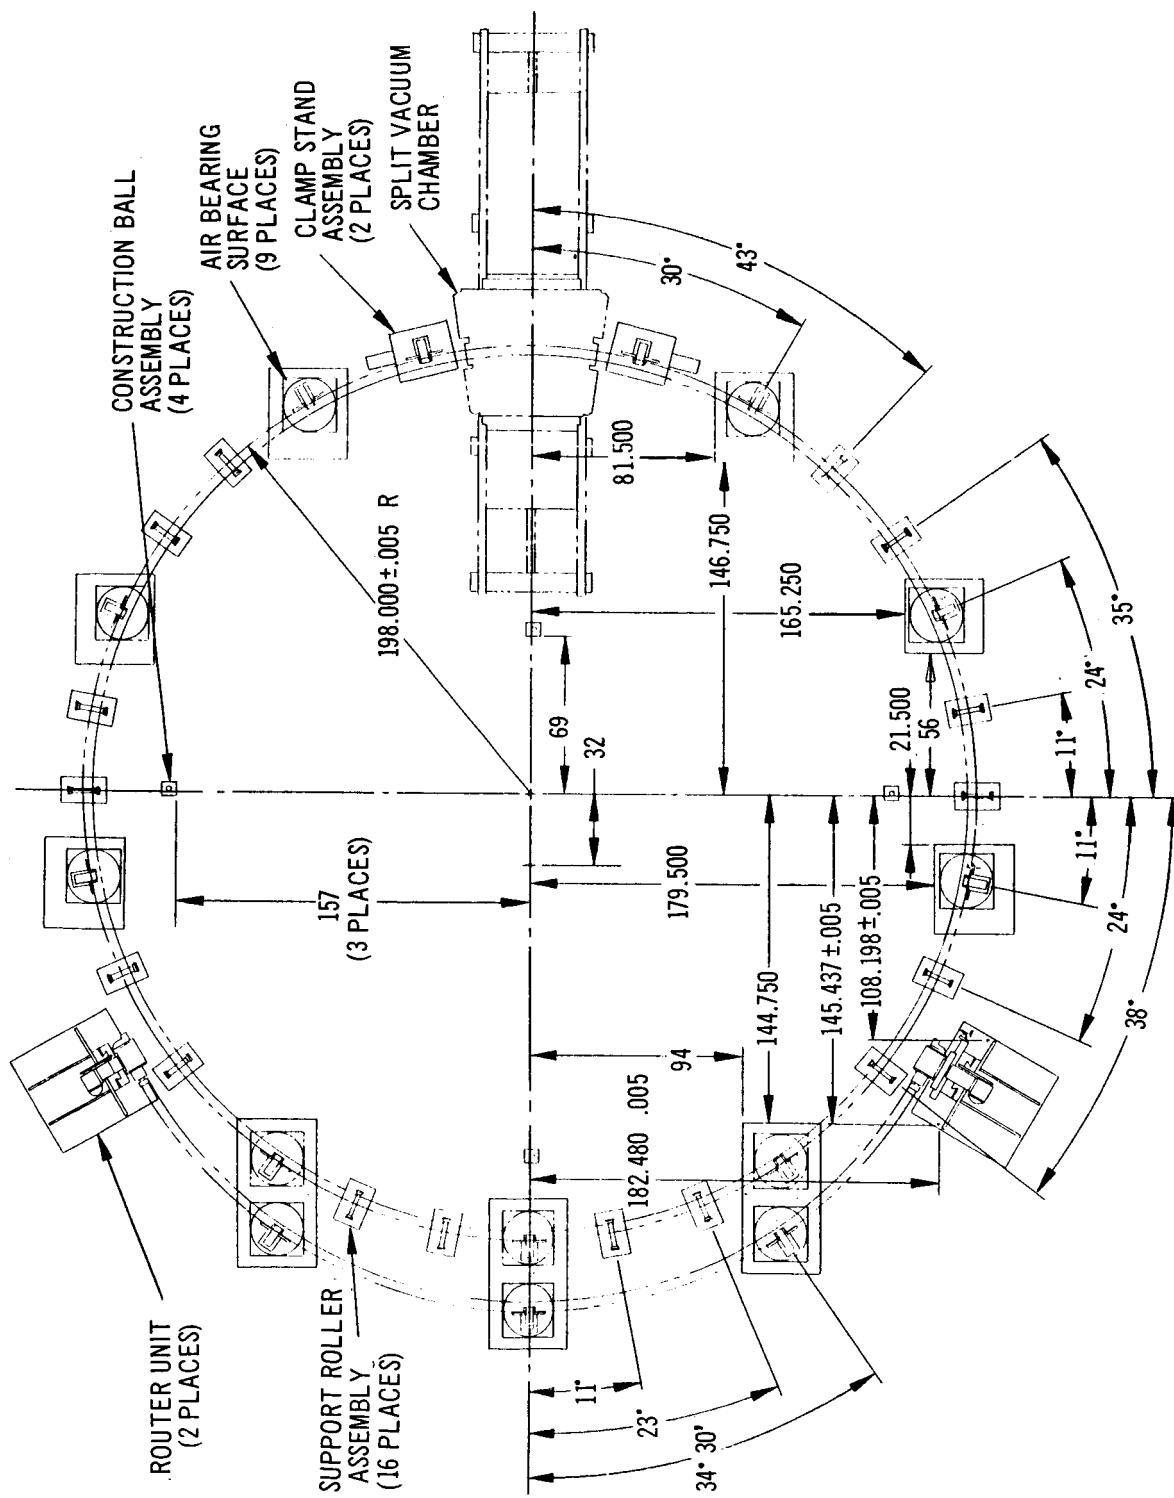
DIMENSIONAL LAYOUT OF TOOLS USED TO ELECTRON BEAM WELD Y-RING
